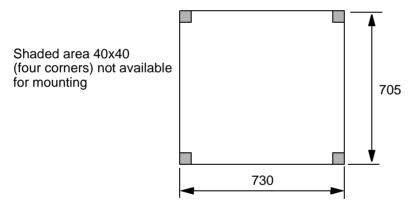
Mounting plate for mounting of equipment (dimensions in mm).
